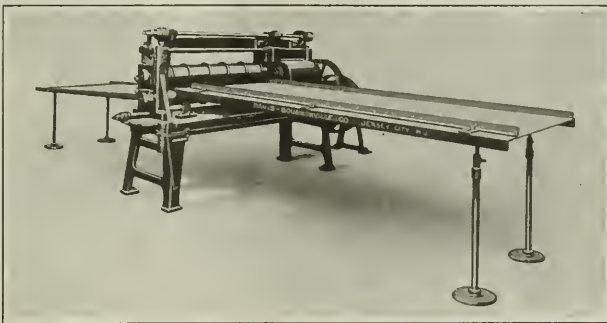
Machine for slitting Commercial Steel Sheets, which is built by the Davis-Bournonville Co.
